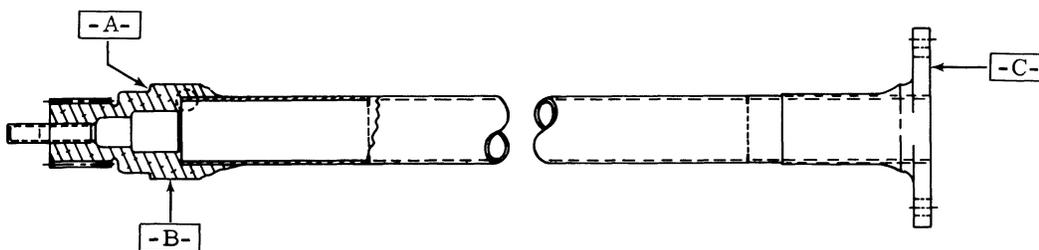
Tail Rotor Drive Shaft (Clamp Type) Bearing Hanger — Damage Limits
